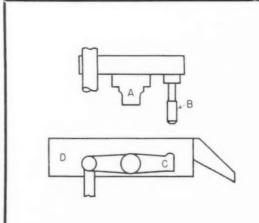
FIG. I—Drawing shows essential elements of floating die table on a Stokes Model 294 Powder Metal Press. A is the single descending punch. B is the depressor moving with the punch and striking boss C on lever attached at its midpoint to die table D. The table moves downward at one half of punch speed and imparts pressure equally from top and bottom to metal powder.
